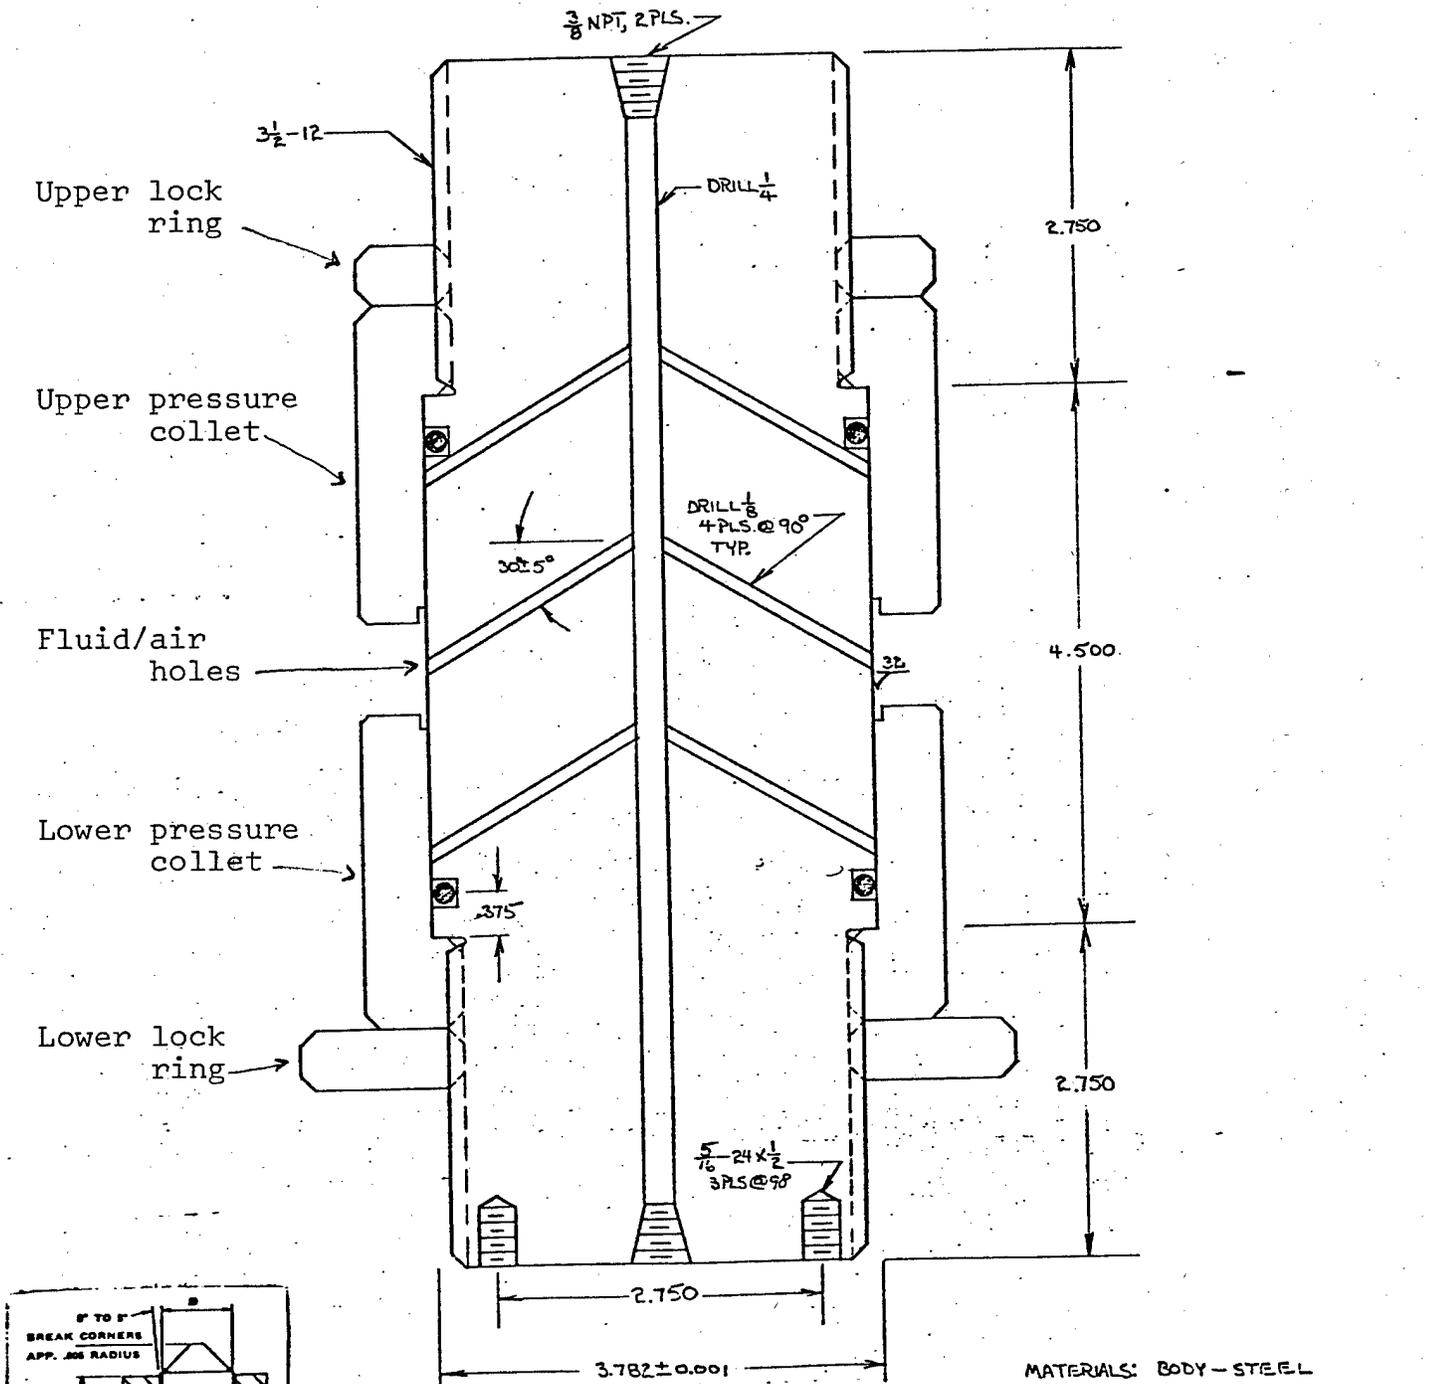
Dimensioned Drawing of Internal Pressure Only Fixture
